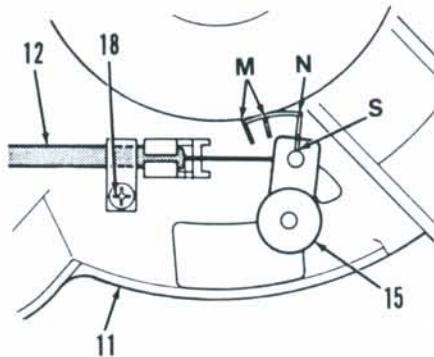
With clutch lever in neutral position, slot (S) in arm (15) should align with mark (N) on housing (11). With clutch lever in forward or reverse gear, slot (S) should be in center of marks (M). Loosen screw (18) and move cable (12) to adjust.
